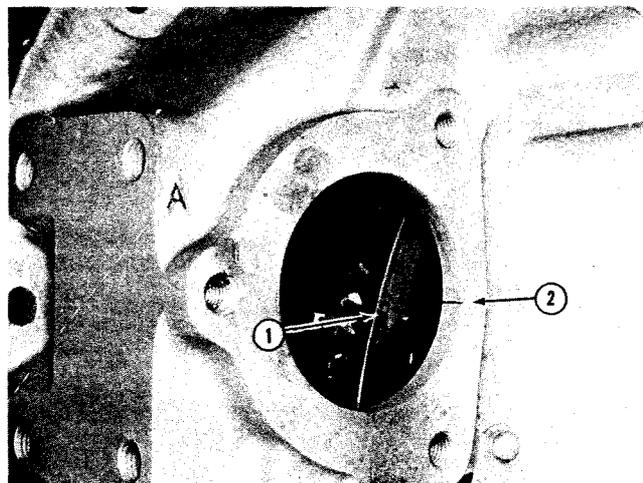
, (K21918). Valve set marks on right bank flywheel and housing — KT/KTA38
